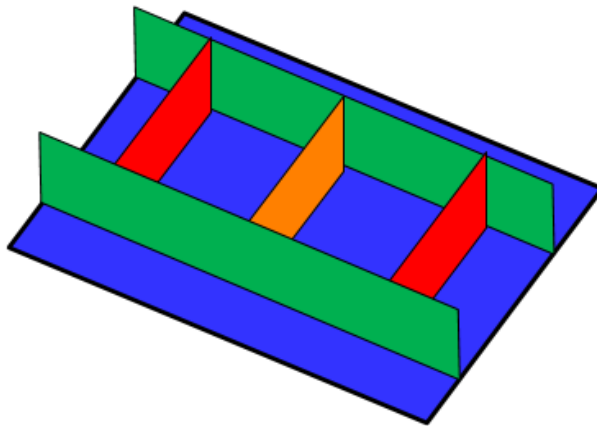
Isometric view of upper plate illustrating rib configurations.
